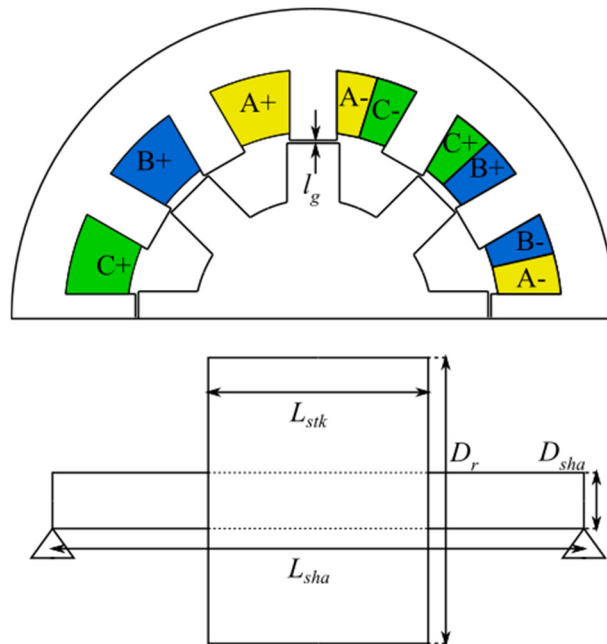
Top) Representation of a three-phase, two-repetition SR Machine; the right-hand side shows a conventional, concentrated winding configuration, whilst the left-hand side an example of the fully-pitched. Bottom) axial scheme of the full assembly of an SR machine.
